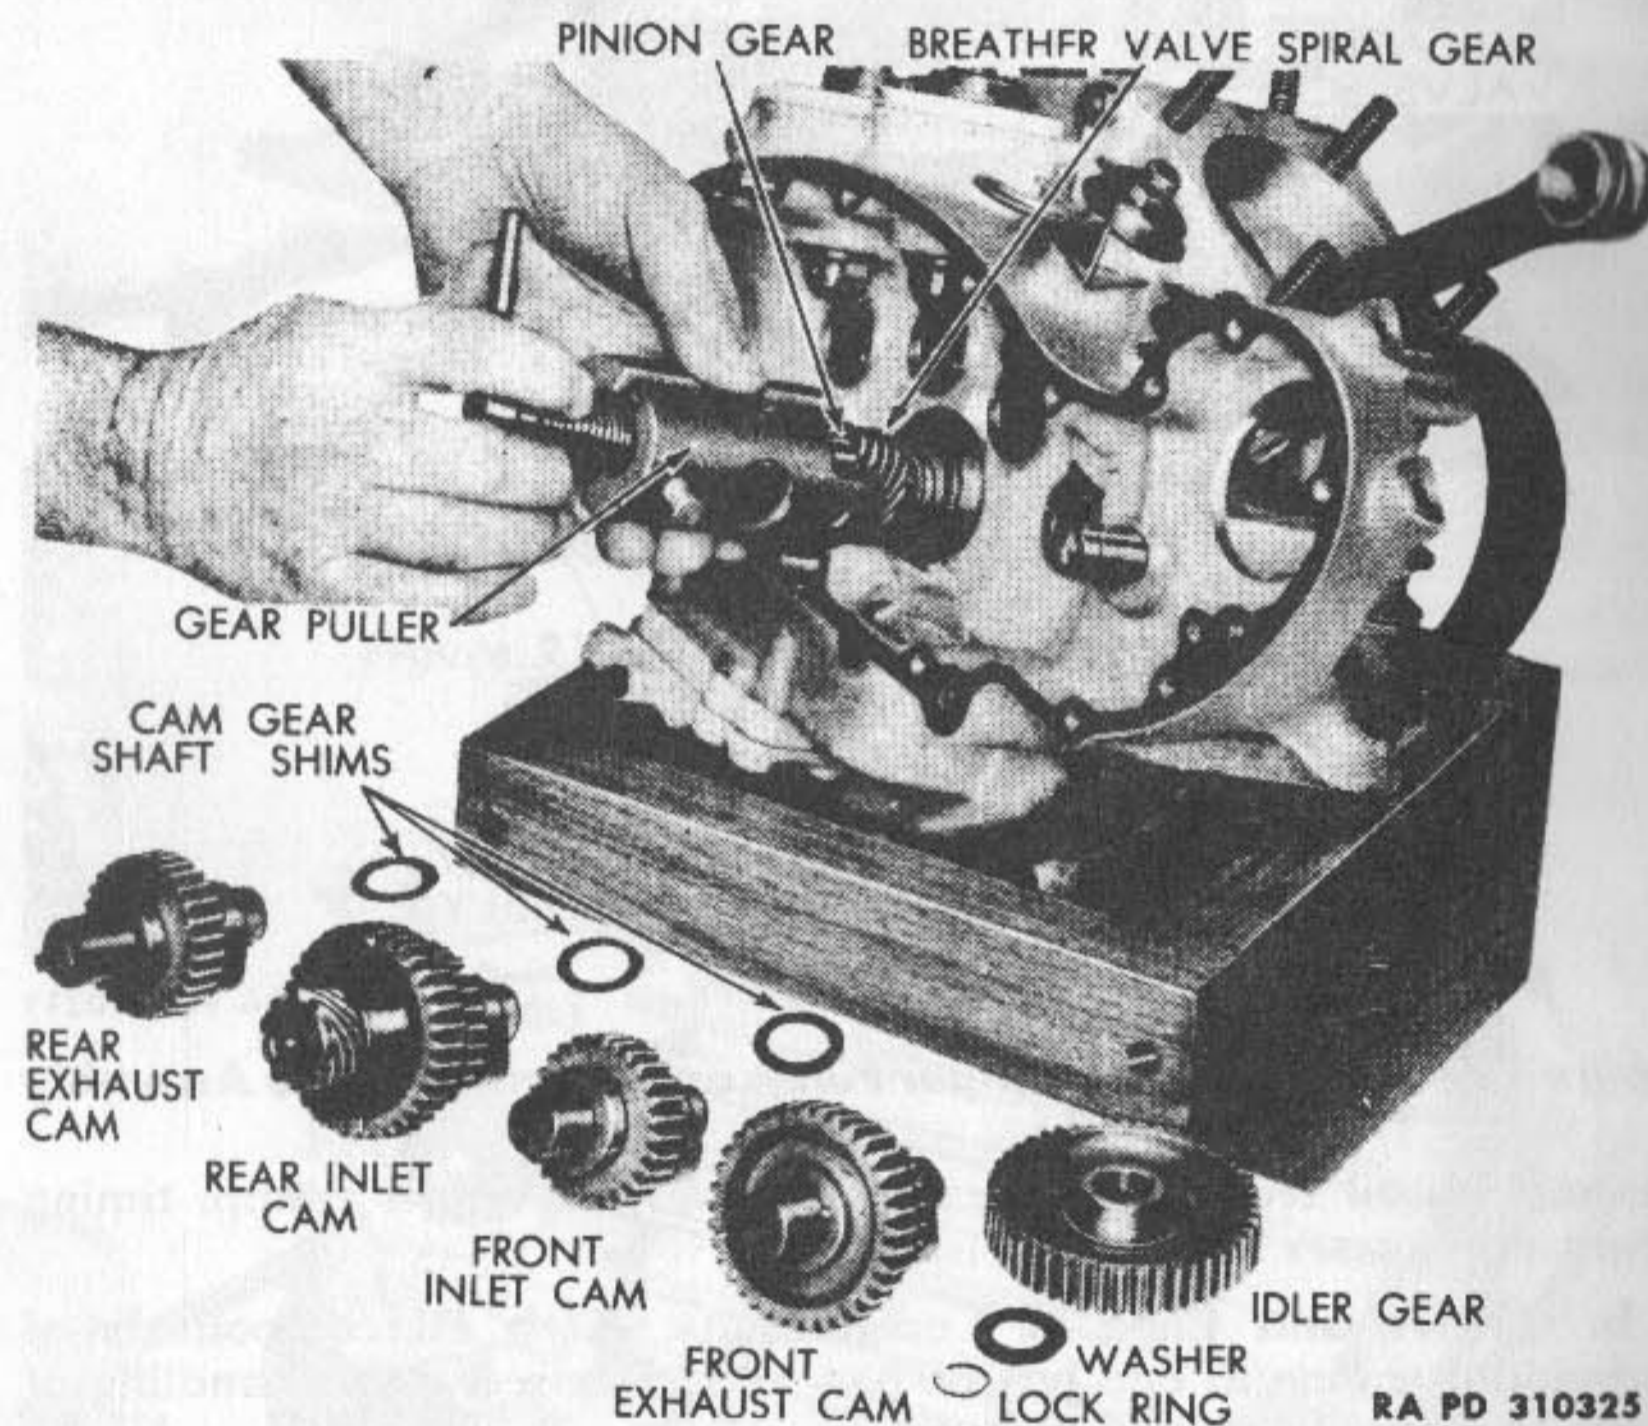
Removing Timing Gears with Puller (41-P-2903)
